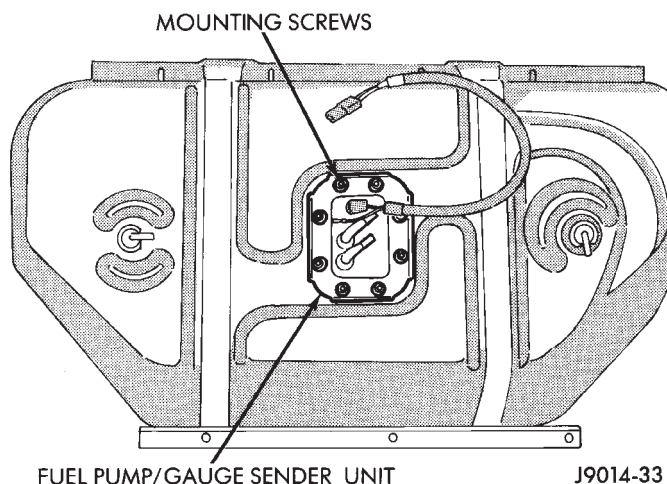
Fuel Pump Module—Remove/Install—YJ Models
